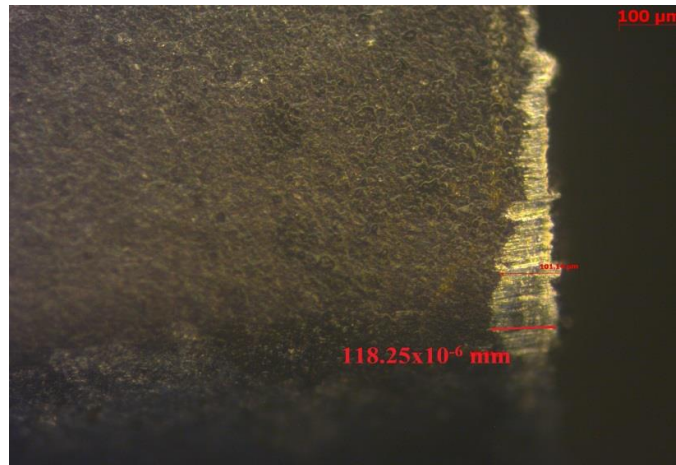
(d) Flank wear for PVD coated tool for Spindle Speed 800 RPM, depth of cut 0.8 mm, feed rate 0.08 mm/rev
